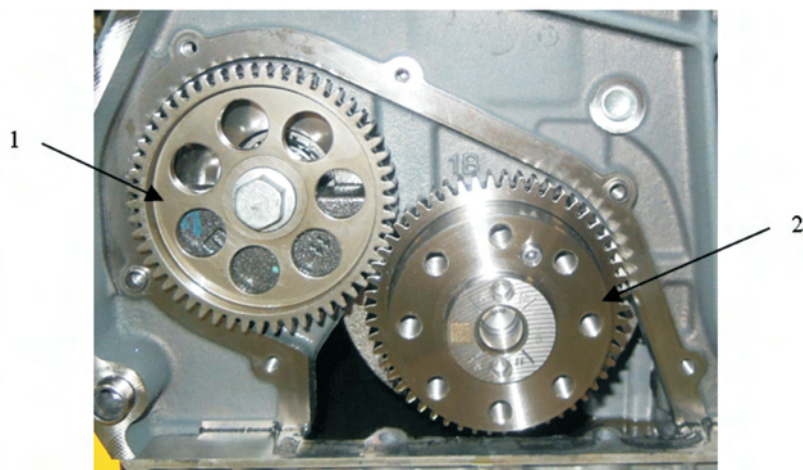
Gear set of the ratio of 1:1 fitted in a spark ignition engine: 1 – toothed wheel of the balance shaft, 2 – crankshaft with a toothed flange
